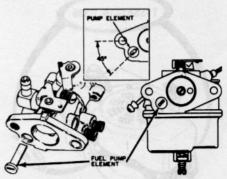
The fuel pumping element should be installed at 45 degree angle as shown for Tecumseh diaphragm type carburetor (left) and float type carburetor (right).
